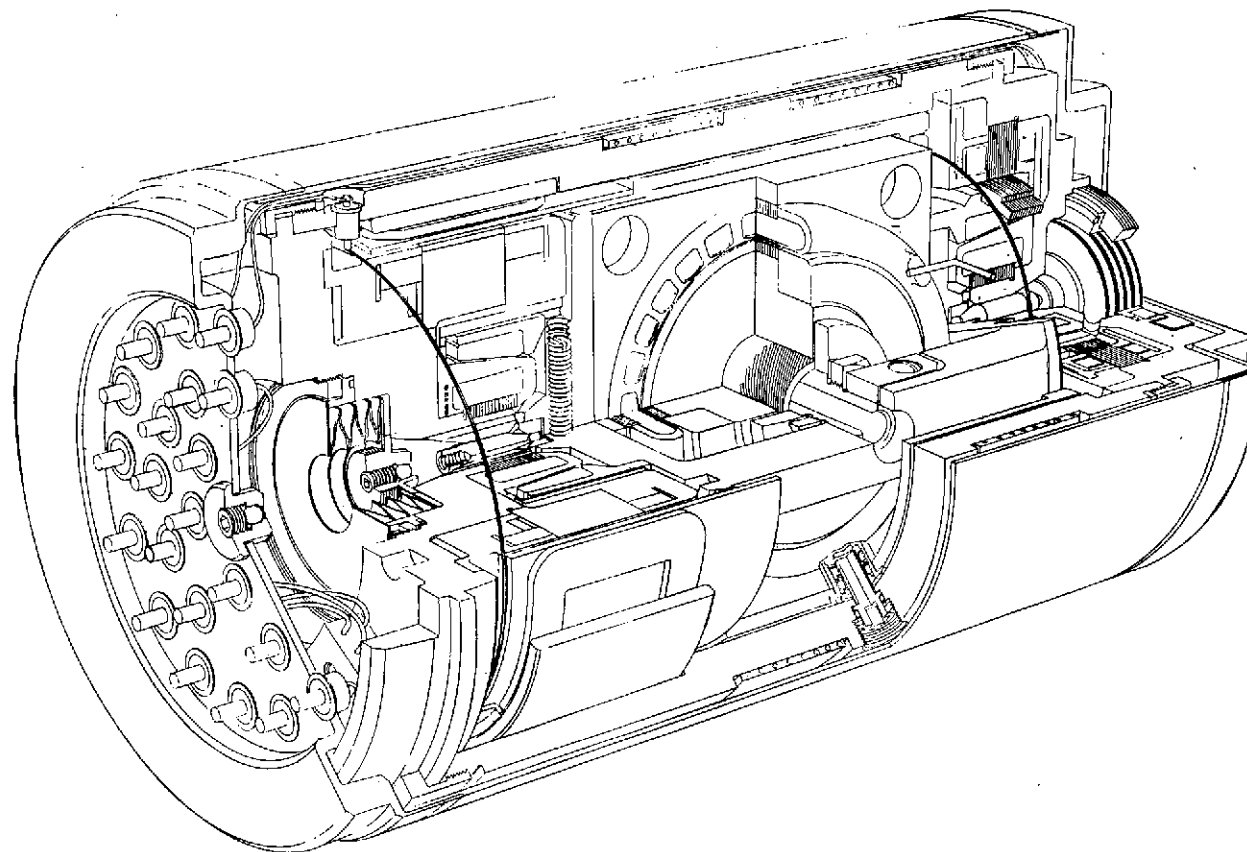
18 IRIG MOD B CUTAWAY VIEW
